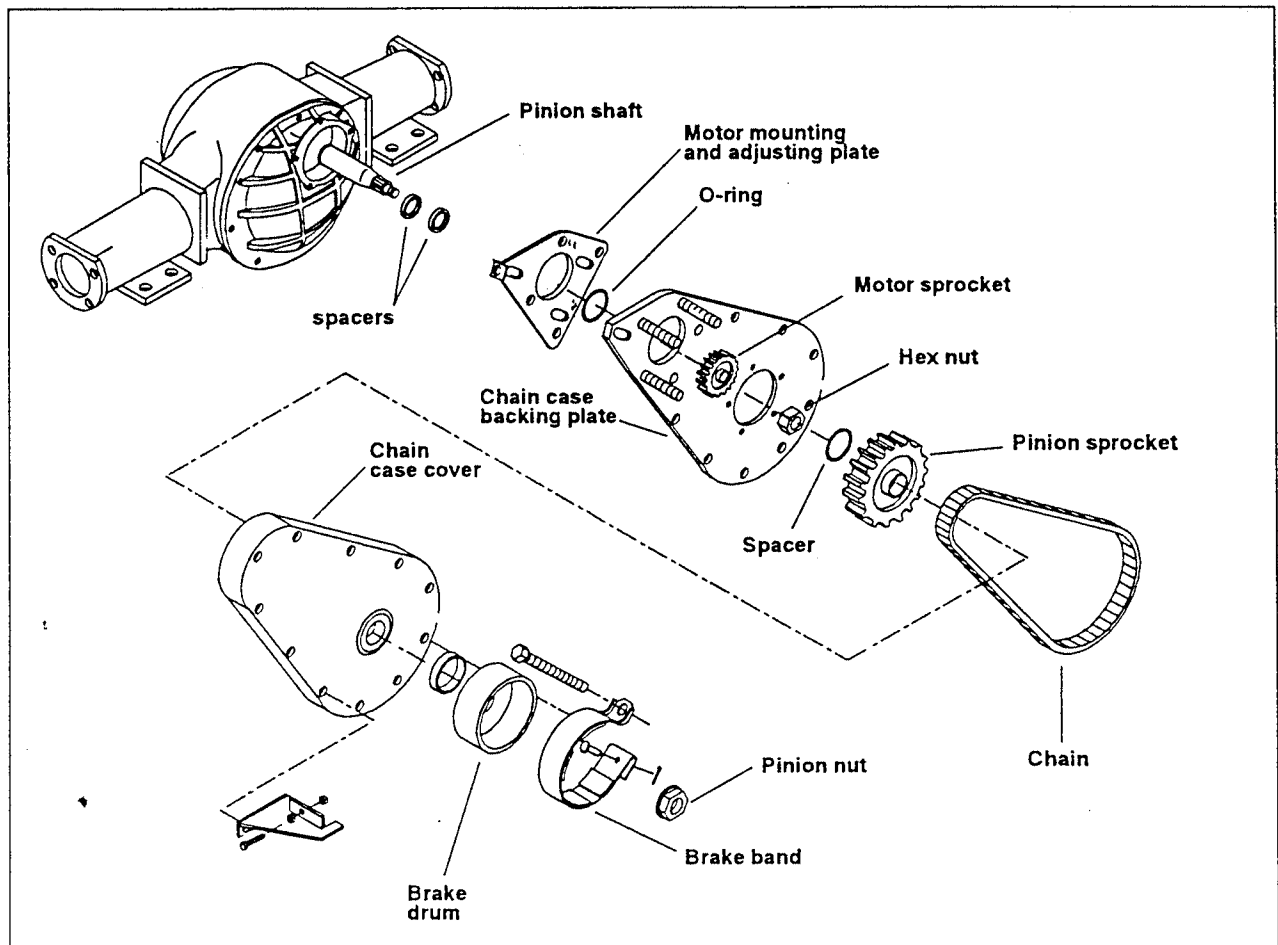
Disassembling and Reassembling the Power Traction Assembly
